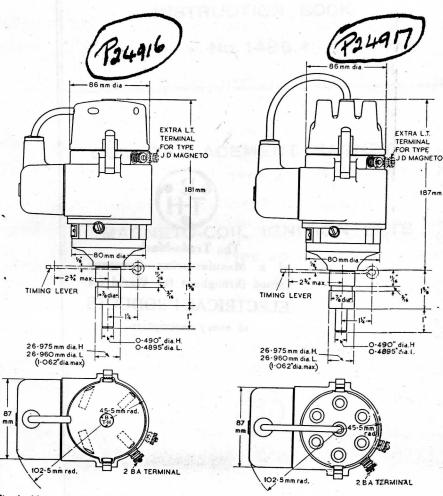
Magneto with radial lead distributor for coil replacement purposes.
